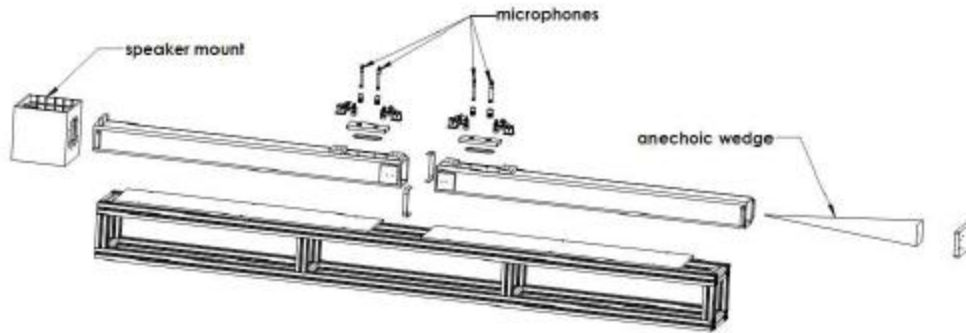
Exploded view of the OSU transmission loss tube. [35]
